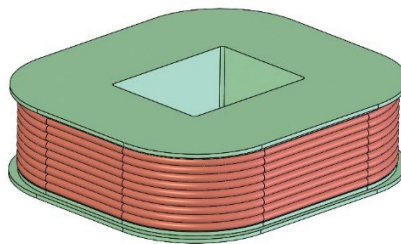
SolidWorks Screenshot of Conductor on 3D Printed Bobbin
